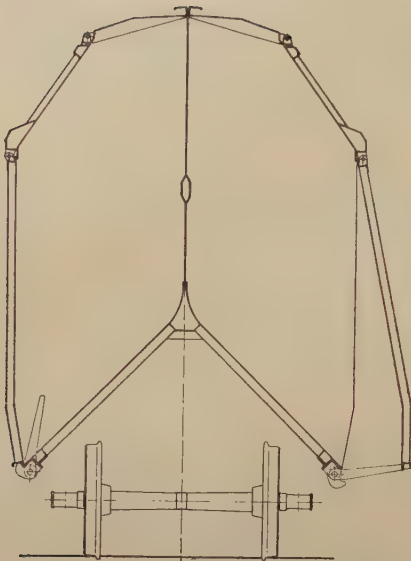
Cross section of a welded saddle-bottomed wagon.
